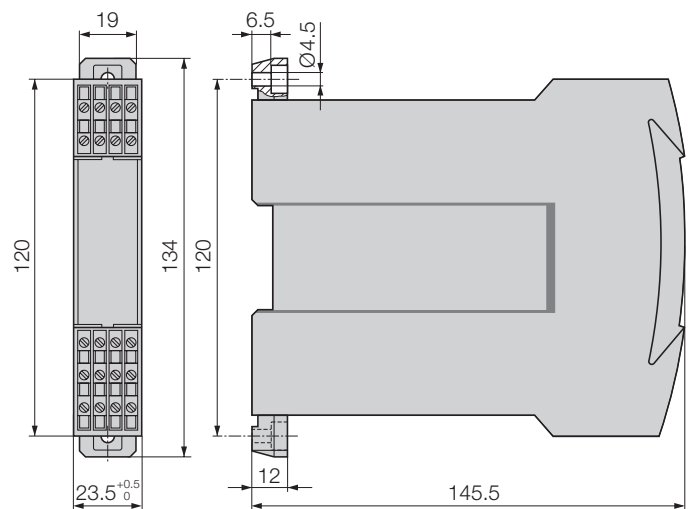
SINEAX SV 814 in housing S23 screw hole mounting brackets pulled out.
